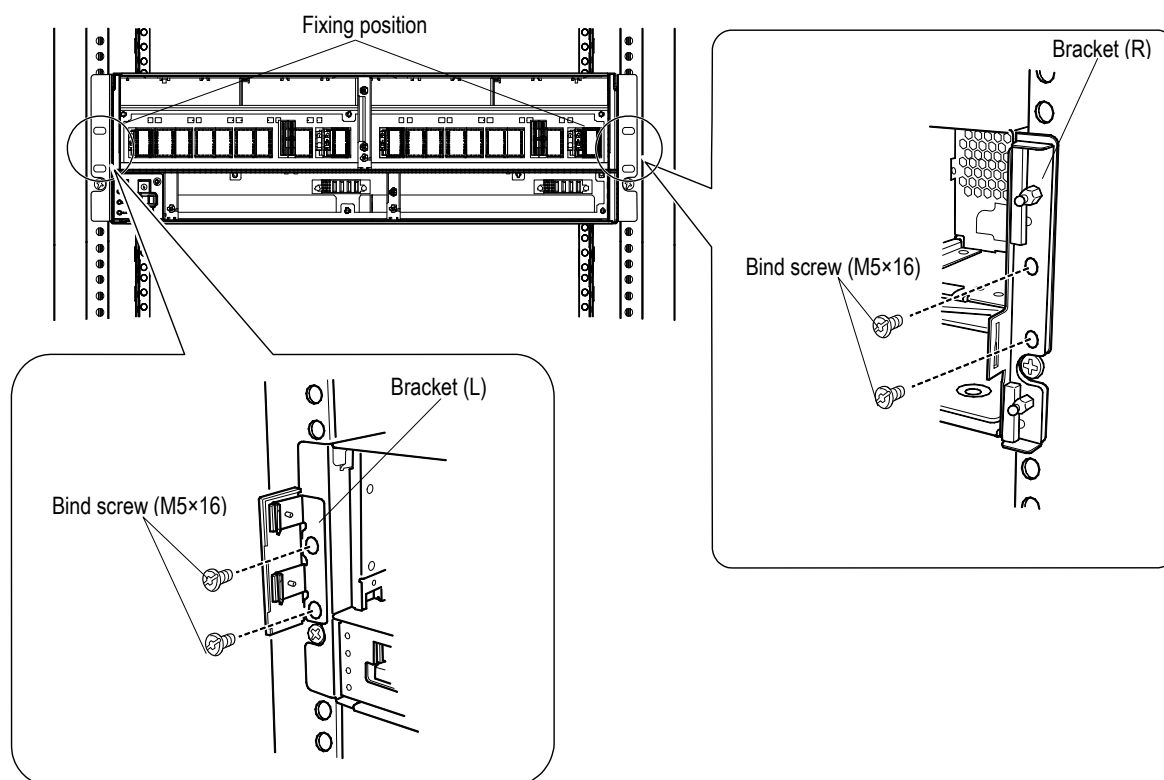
Fixing the Front Side of the Array (Controller Box (3U))
